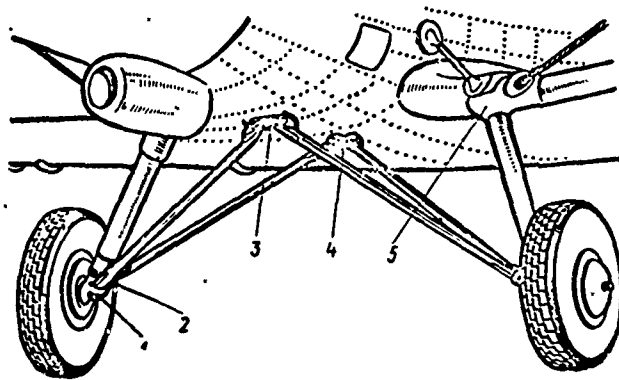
Aircraft landing gear: 1 - semiaxle mounting lug to front strut; 2 - mounting lug of rear strut to front strut; 3 - mounting lug of front struts to fuselage frame No. 4; 4 - mounting lug of rear struts to fuselage frame No. 6; 5 - shock absorber mounting lug fairing.
